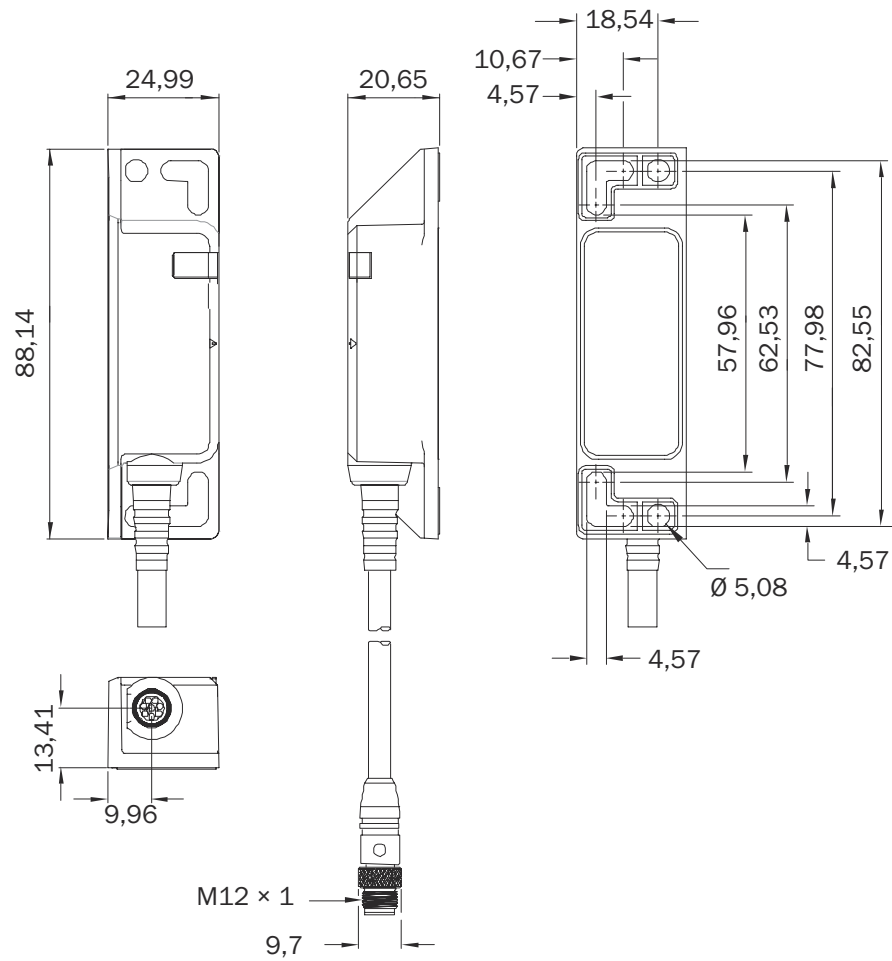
Sensor dimensional drawing (mm) (version with male connector)
